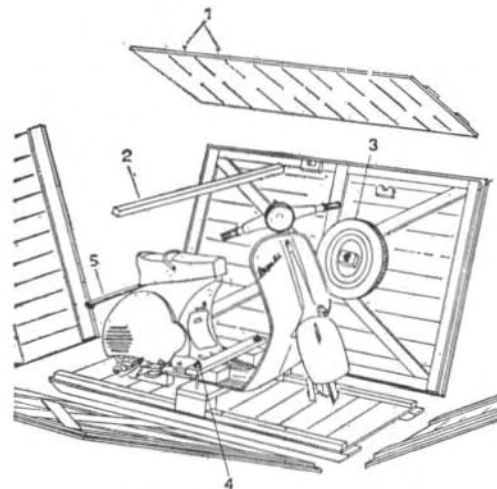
Crate for Vespa G.S. with wheels only removed.
